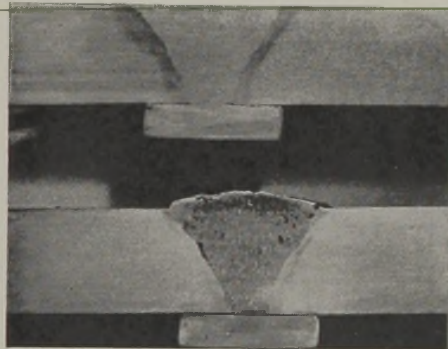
(top) Sound butt weld. (bottom) Porous butt weld caused by short arc and insufficient puddling.
